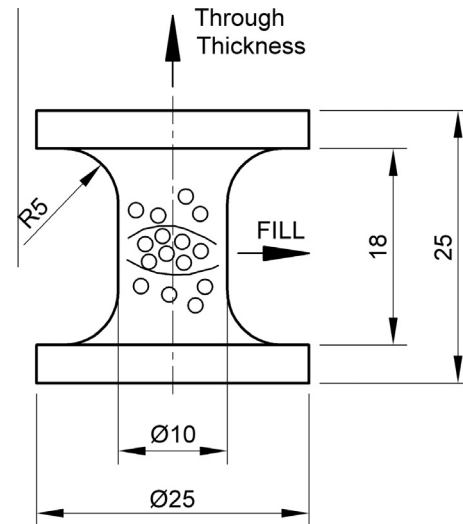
Out-of-plane tensile specimen geometry, units in millimeter.
